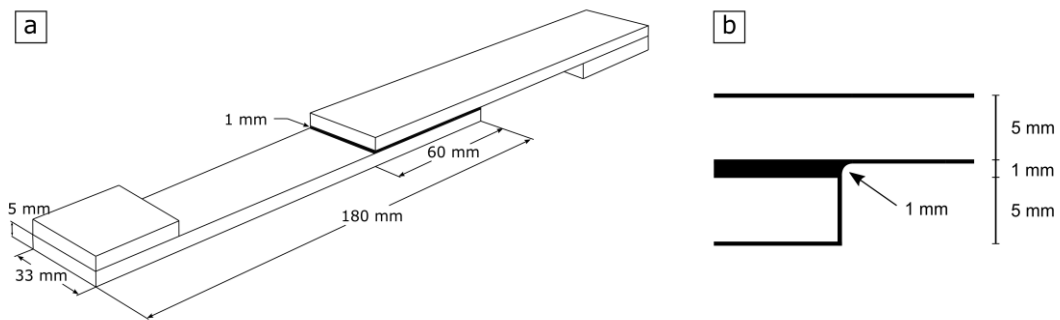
SLJ specimen geometry; and (b) detail of the overlap end.
